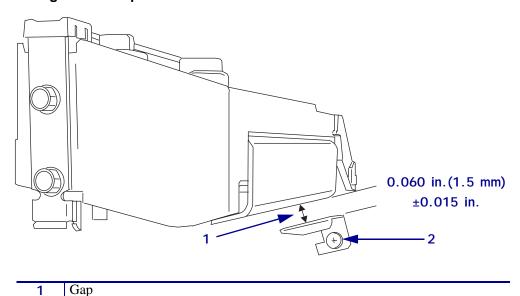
• Gap Measurement between Print Mechanism and Sensor
